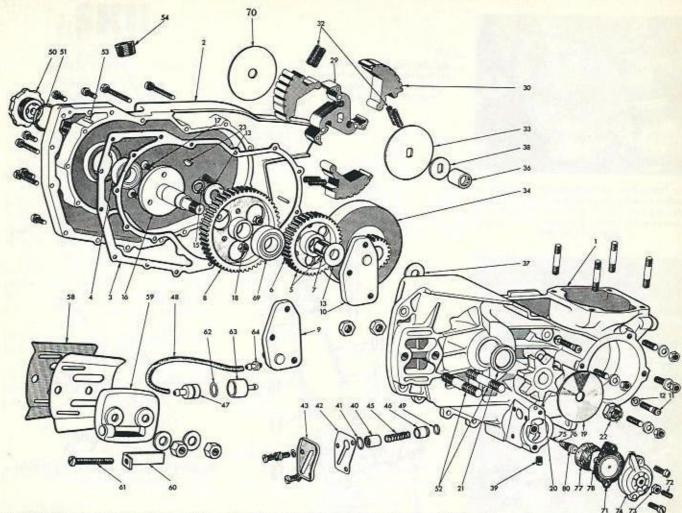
Exploded view of gearbox assembly used in later models showing component parts and their relative positions. Note the two one-piece idler plate assemblies (9 and 10) used on late model saws. Idler plate (9) is used for 3:1 reduction and idler plate (10) is used for 2:1 reduction. An idler plate for 31/2:1 reduction is also available.
